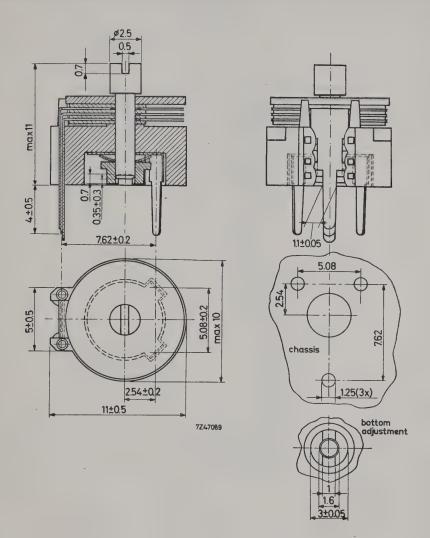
Main dimensions in mm of the trimmer C 010 MA/60E with mounting diagram
